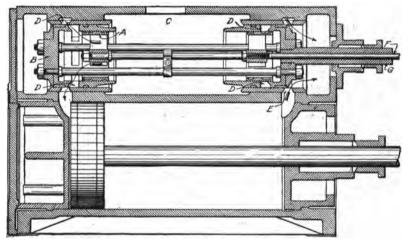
Section of Cylinder and Valve-Gear Mechanism of Thompson Automatic Valve Gear
